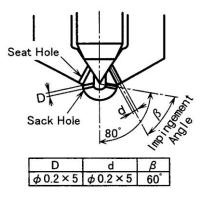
Configuration of Impinged-Spray Nozzle with Engine Tests ( 5 sets of impinged holes )
